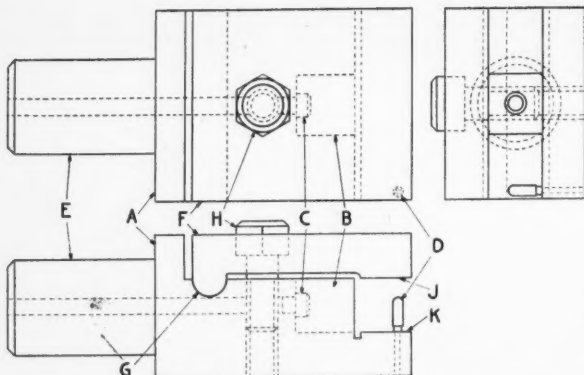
Design of Fixture Used to Hold Tee for Machining in a Turret Lathe
